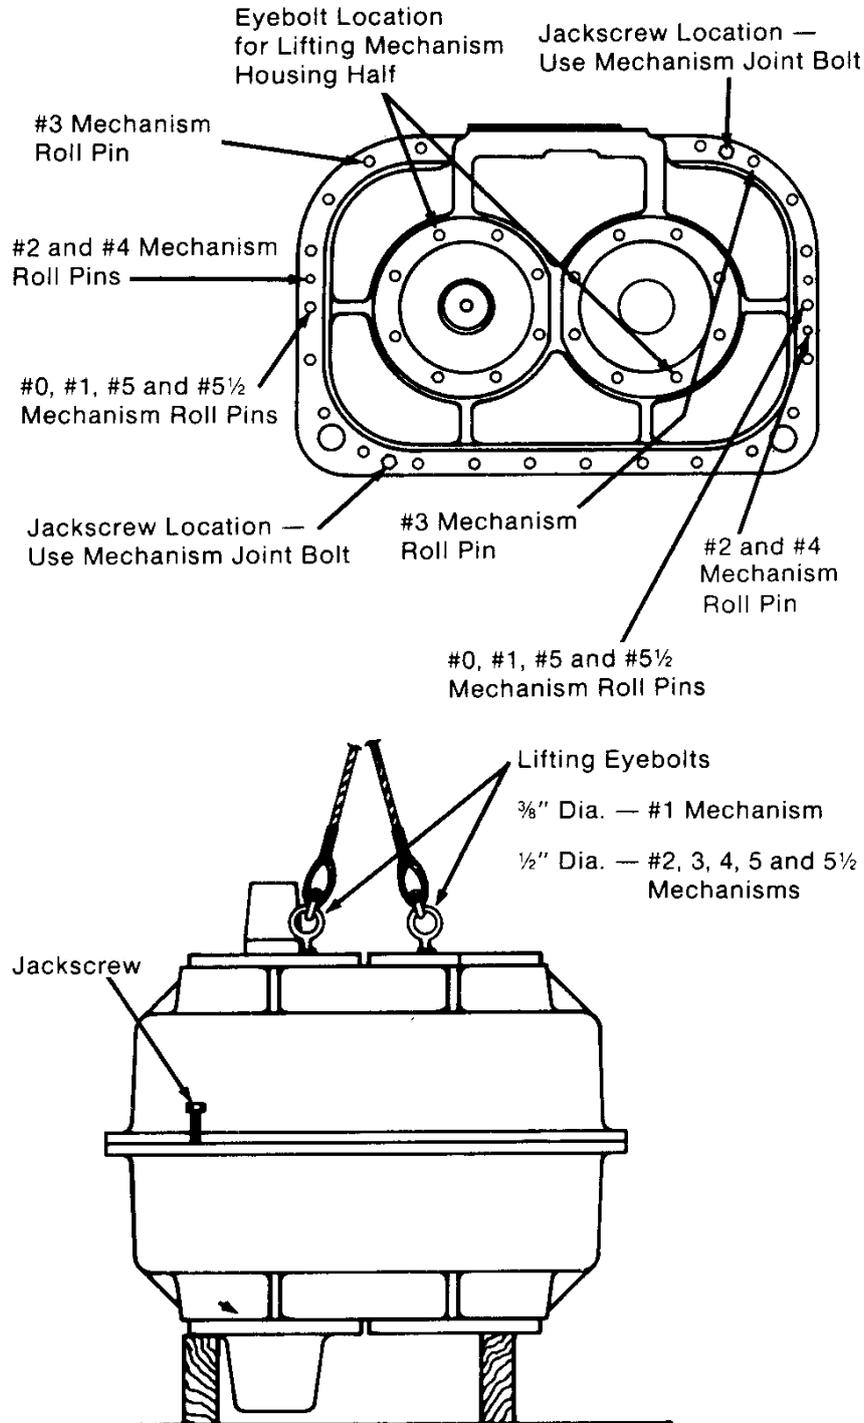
Method of dismantling housing halves (lower) Roll pin, eyebolt and jackscrew locations (upper)
